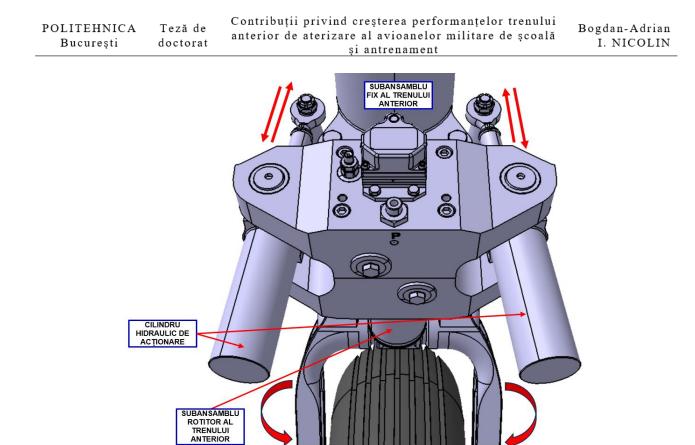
Hydraulic drive for nose landing gear wheel steering
